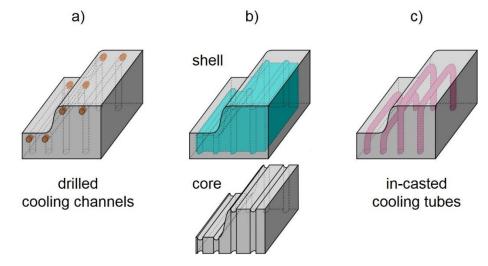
Cooling strategies for hot stamping tool: a) one-part with drilled cooling channels, b) two-parts with shell and core segment, c) one-part with in-casted cooling tubes.
